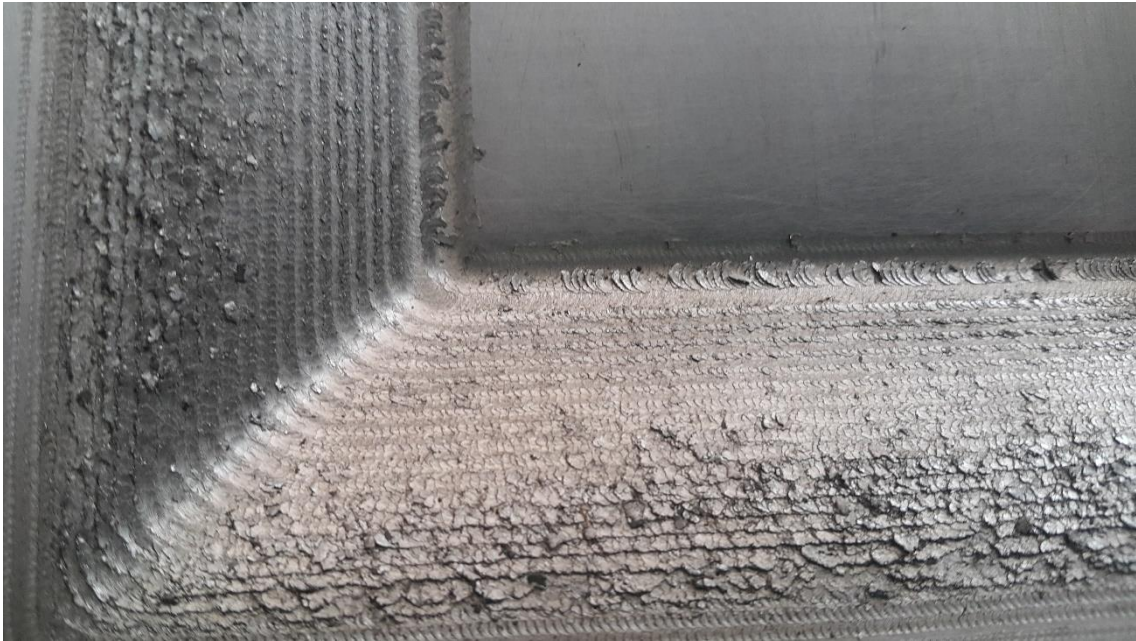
Surface of aluminium sheet with 1500 rpm spindle speed
